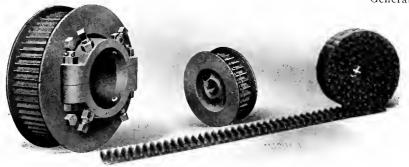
Axle and Generator Sprockets and Chain. Gould Coupler Company.
